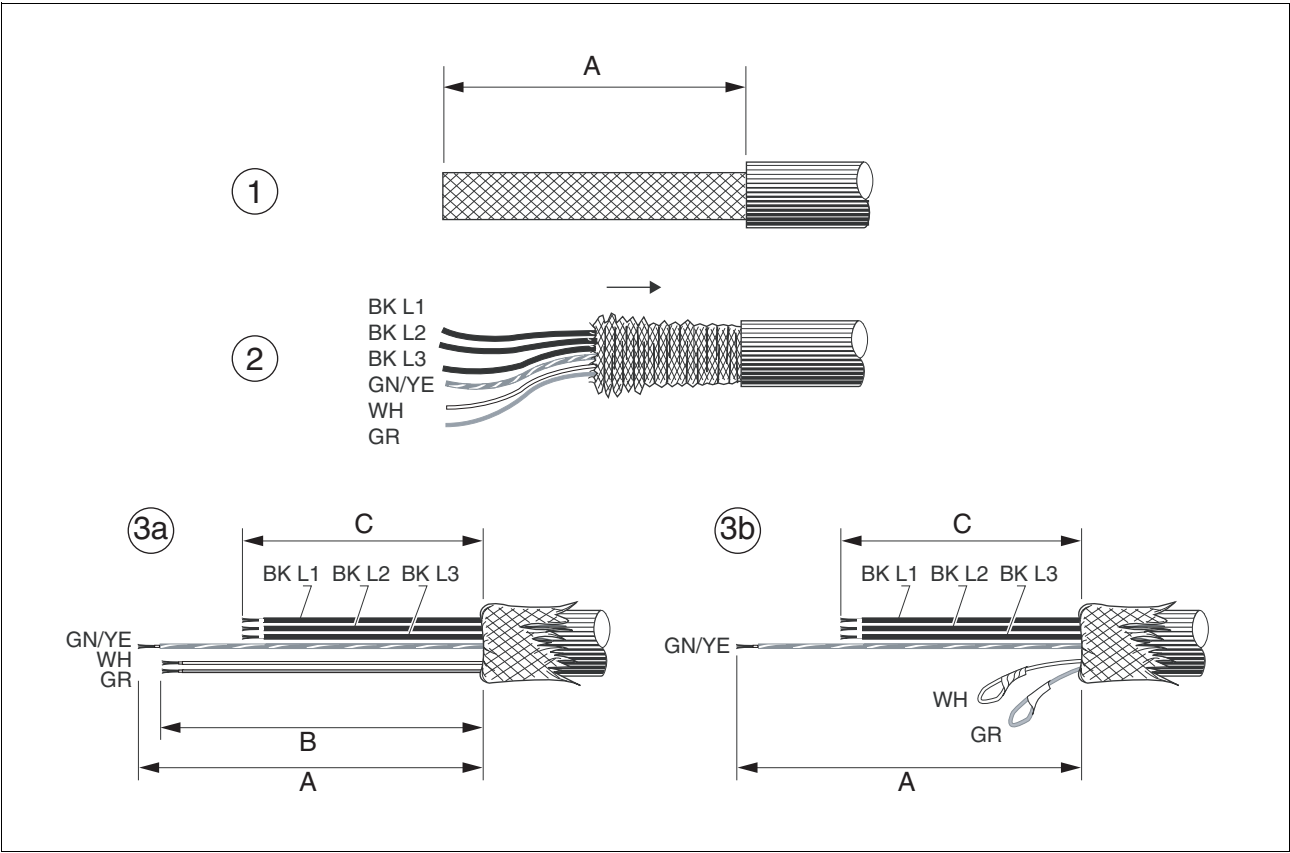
Steps (1-3) for fabrication of the motor cable
